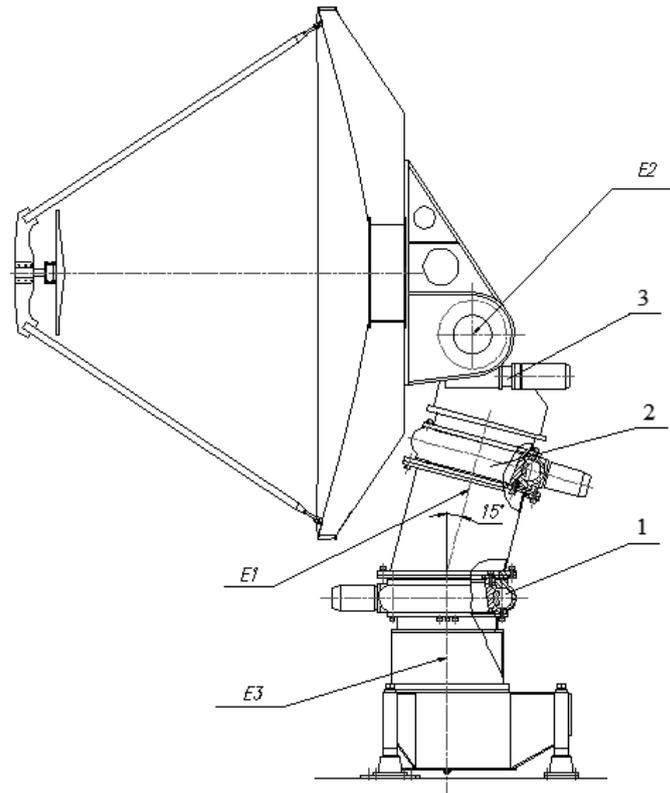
Design of 3-axis antenna with sealed rotary electromechanical modules
